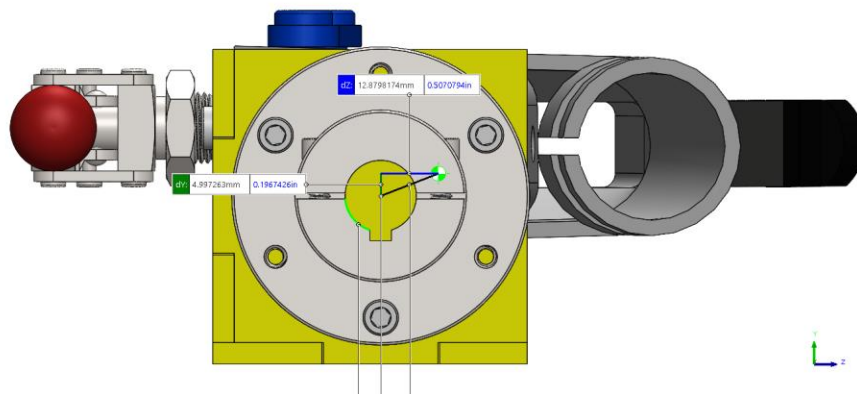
Clamping mechanism with CDAA00 seeding opener.
